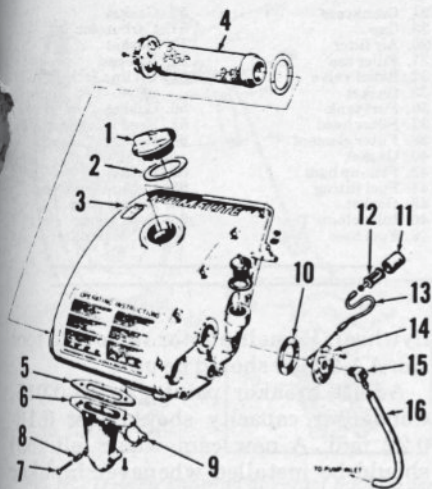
Exploded view showing fuel pick-up installation in tank and carburetor air inlet for models WIZ, Super WIZ, WIZ 55 and Super WIZ 55. Note springs (8) on air inlet elbow to carburetor screws.(7).
